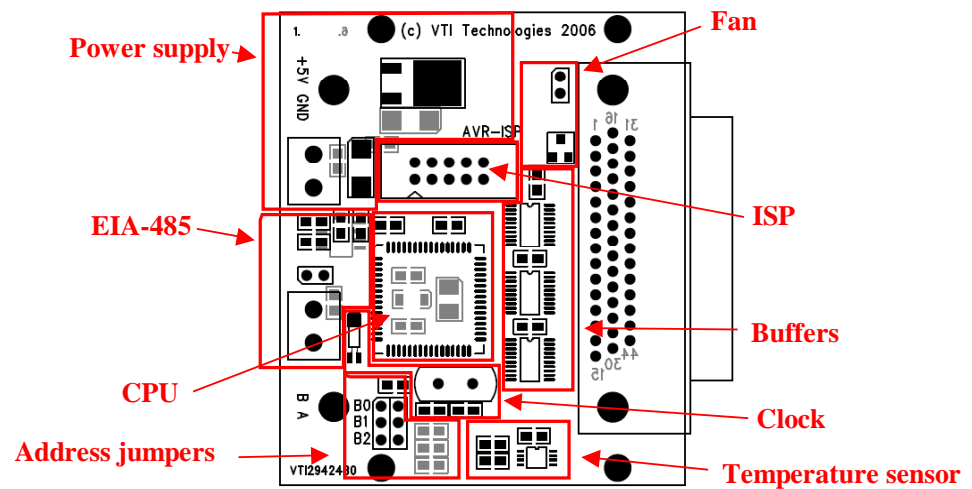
Segmentation of the CPU card. Components on the top side of the PCB are marked on black and components on the bottom side with grey.
